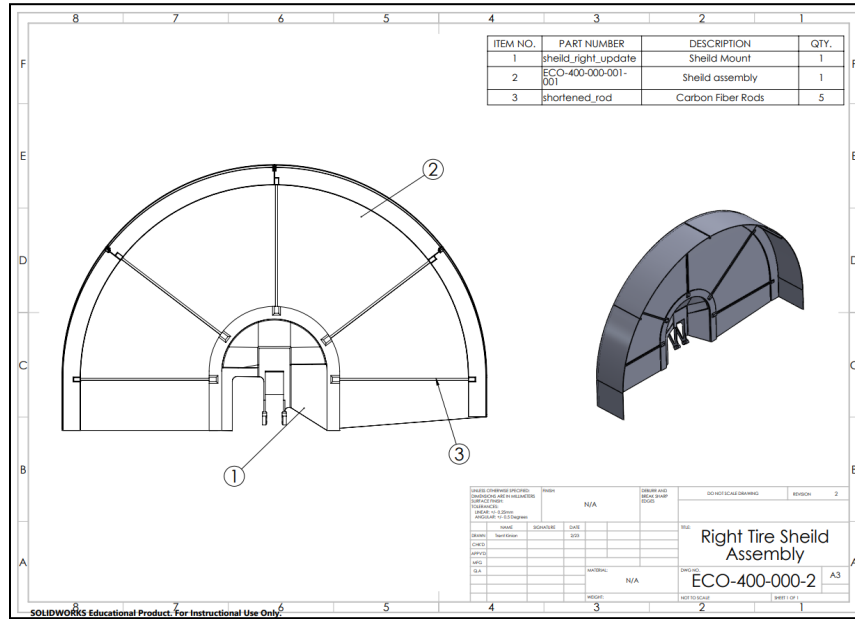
Update full shield assembly showing fanned carbon fiber rods
